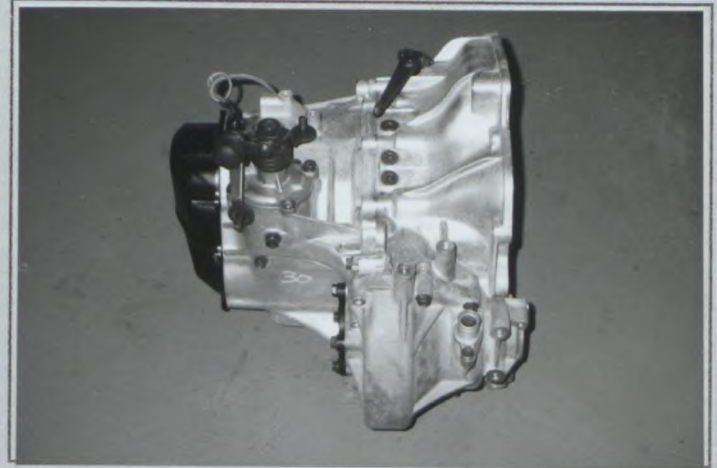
ALTERNATIVE GEARBOX ASSY. 6 SPEED.
